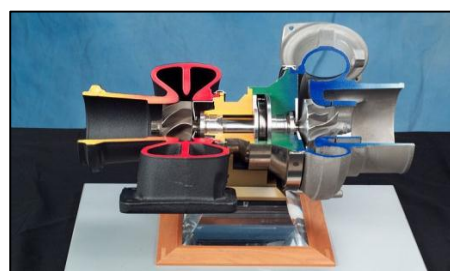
The Turbocharger cross-section with turbine and compressor connected with shaft [2]
